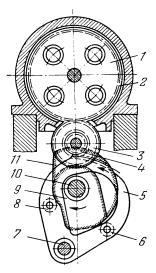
Spindle carrier indexing mechanism of a four-spindle automatic bar machine
